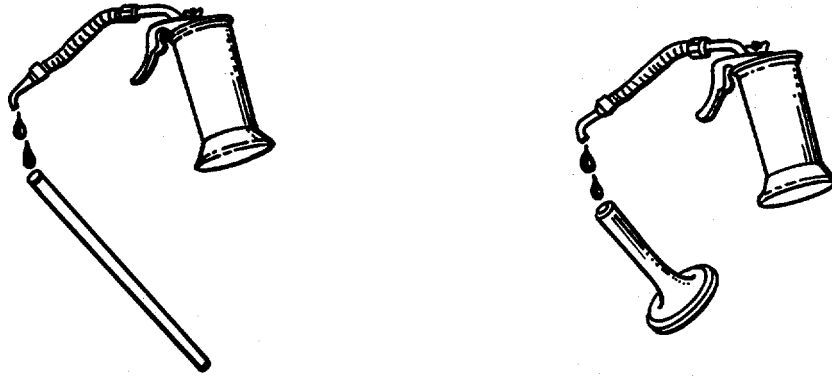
Push Rod and Valve Stem Lubrication.
